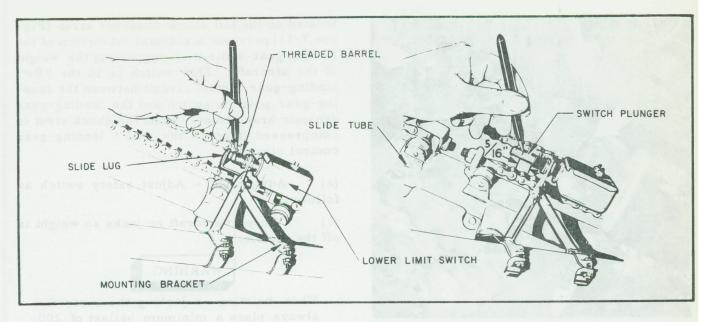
(Issue 1) Landing Gear Lower Position Light Switch Adjustment
